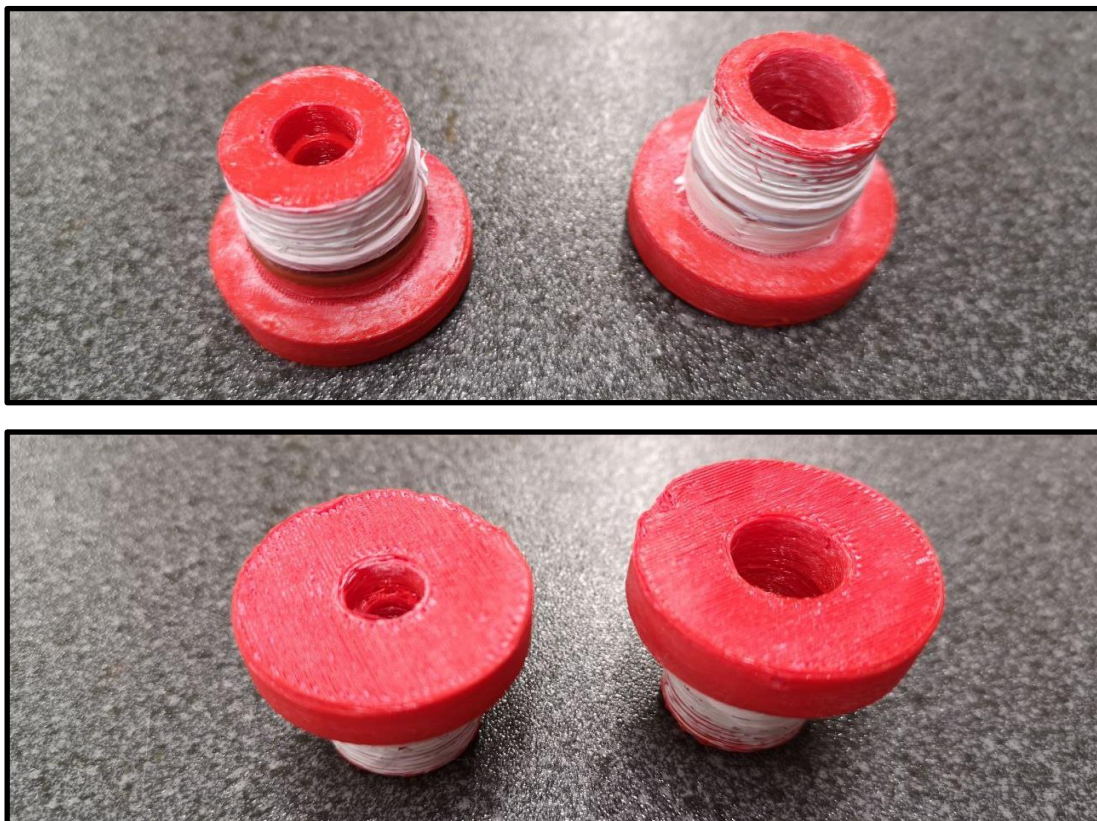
Top and bottom views of the perfusion inlet (left) and assembly inlet (right).
